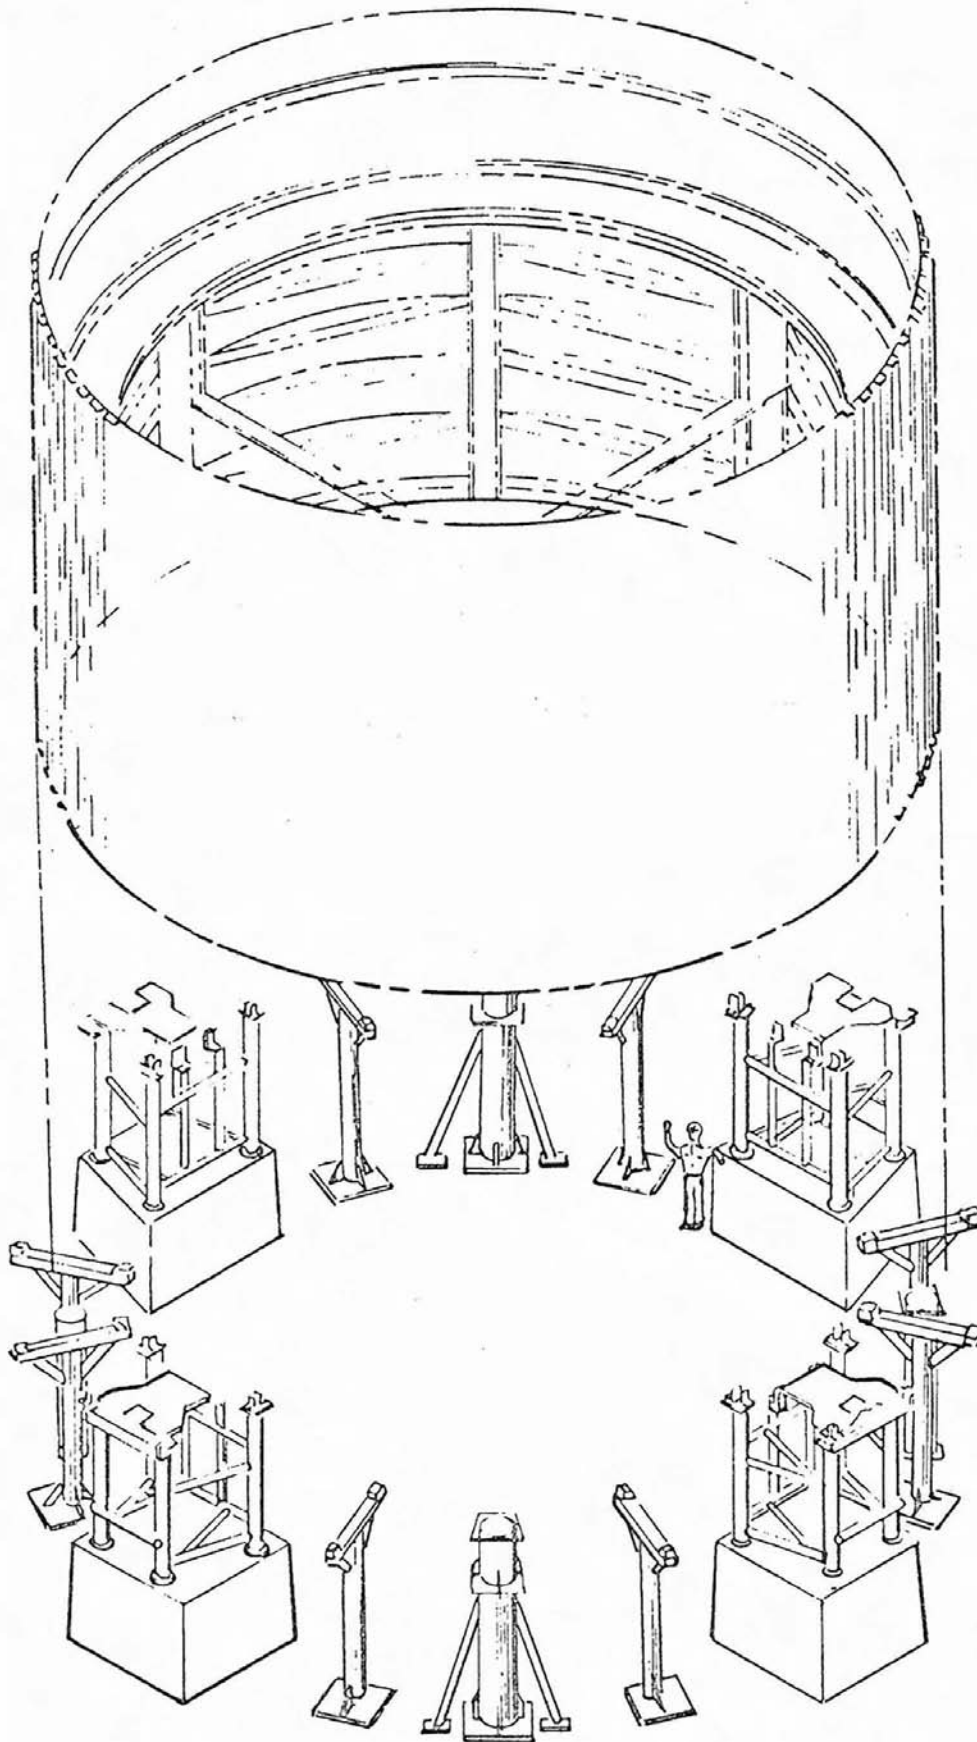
Thrust Structure Second Position Final Assembly Fixture
